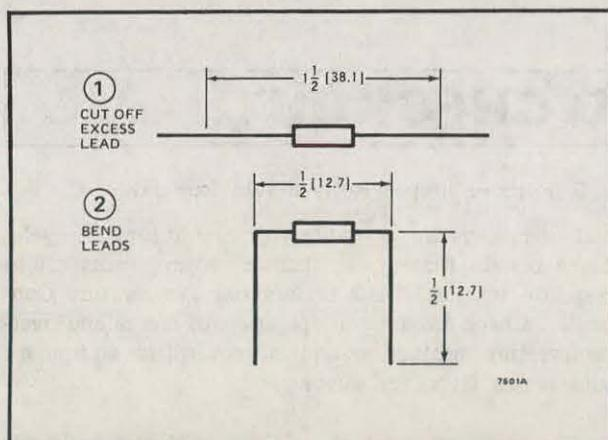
PLUG-IN RESISTOR PREPARATION. DIMENSIONS IN INCHES [MILLIMETRES IN BRACKETS].
